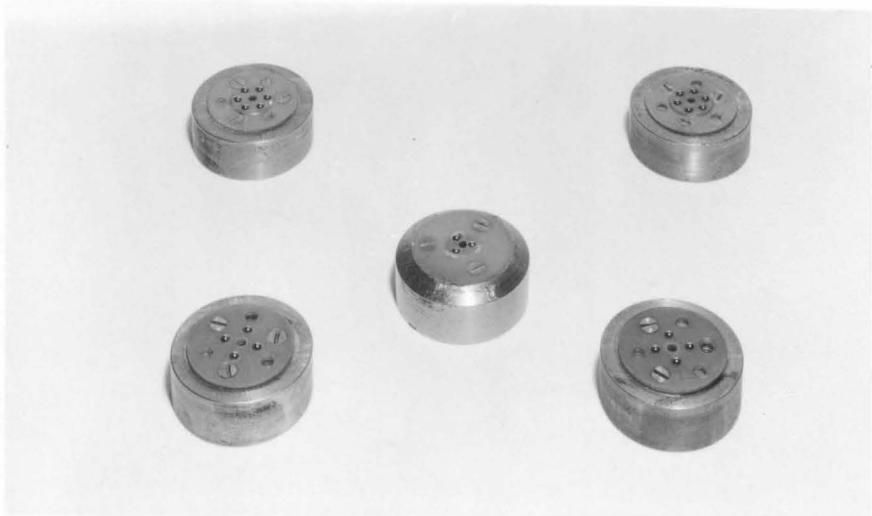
RING PENETRATOR ASSEMBLIES USED ON TESTING MACHINE NO. 1.
